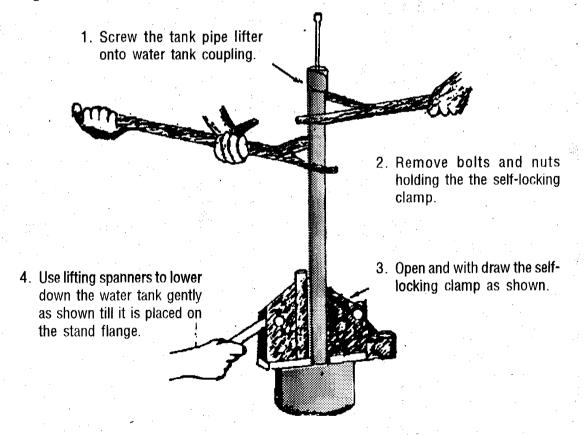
Fix Water Tank on Pedestal Stand Assembly.
